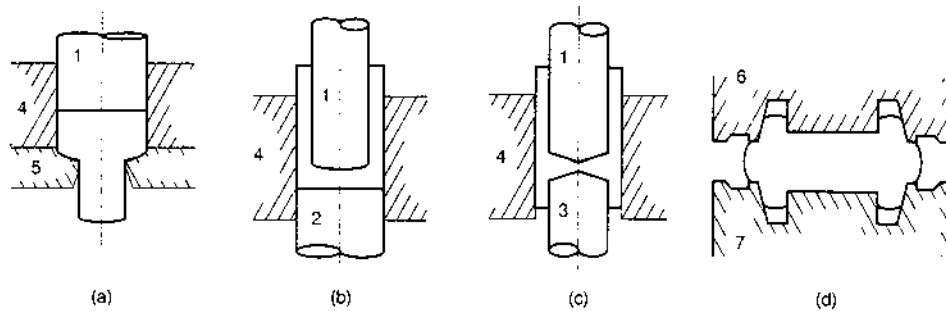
Basic forging operations, 1. Punch, 2. Backup punch, 3. Counter punch, 4. Container, 5. Die, 6. Upper die, 7. Lower die. (a) Forward extrusion of rod; (b) Backward extrusion of can; (c) Simultaneous extrusion of double cans; (d) Die forging.
